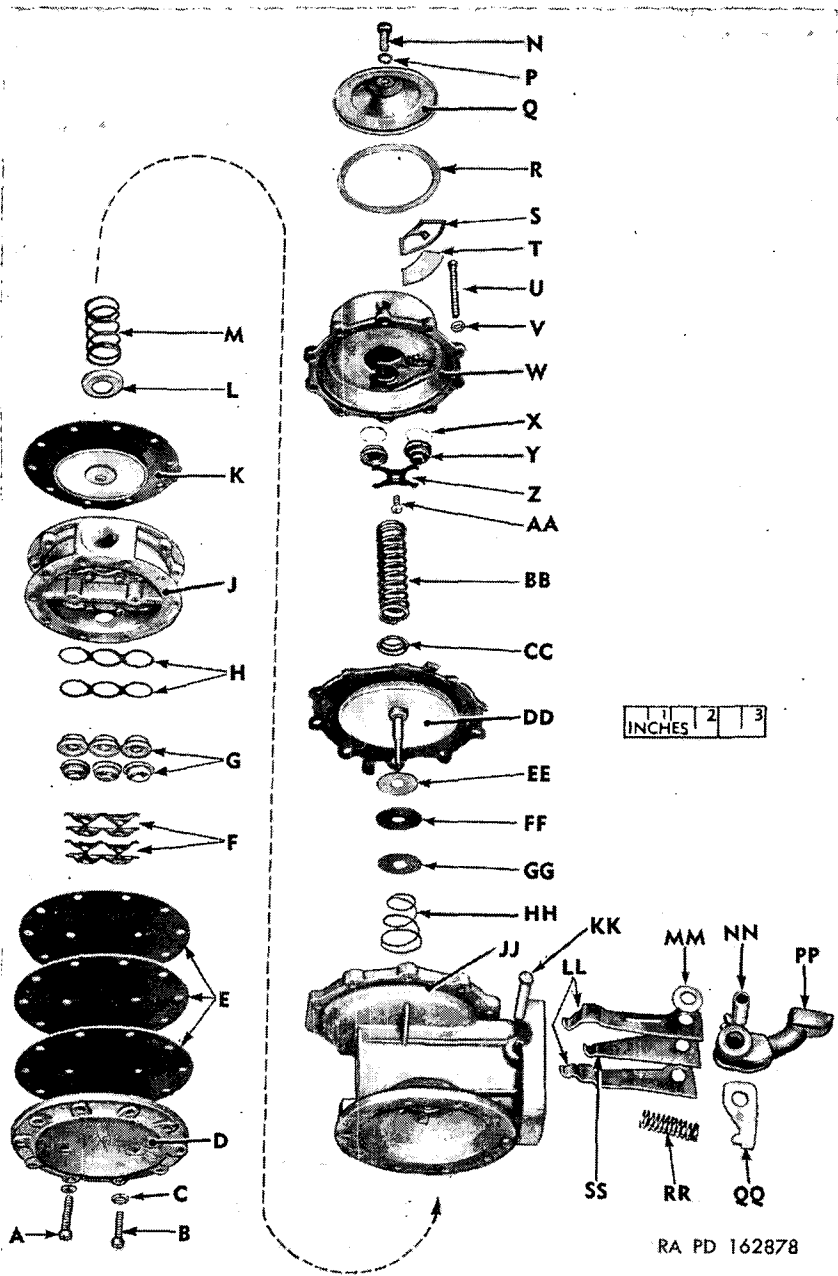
Fuel and vacuum pump—disassembled (typical series BK and BN construction).
